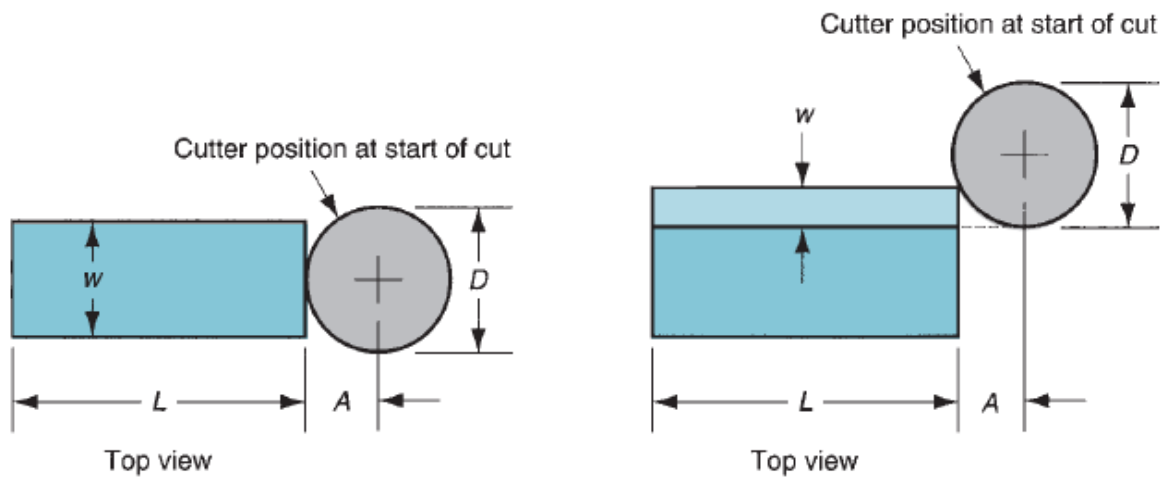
Face milling showing approach and over travel distances for two cases: (a) when cutter is centered over the workpiece, and (b) when cutter is offset to one side over the work.
